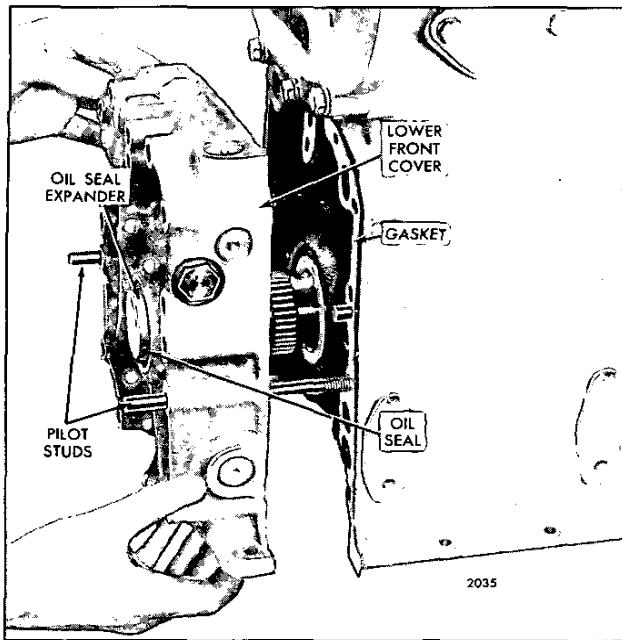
Installing Lower Engine Front Cover — In-Line Engine
